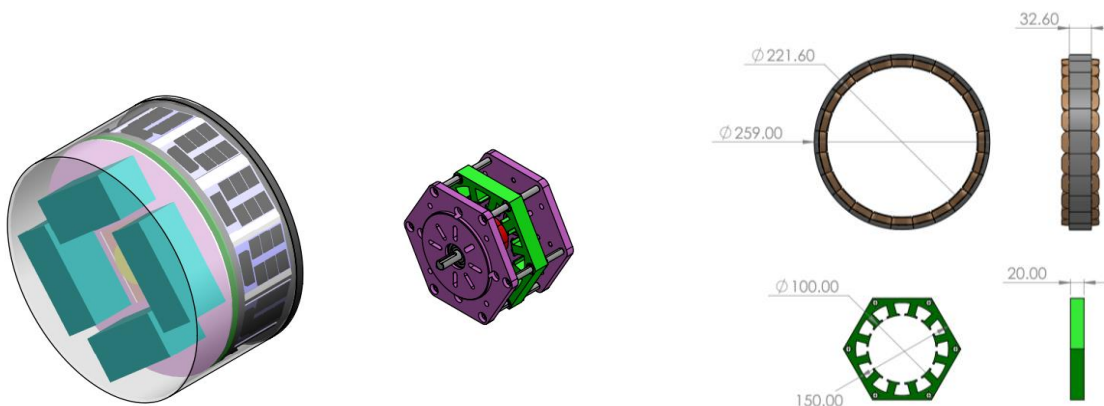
1 To-scale comparisons of the developed quadrotor machine and identified sample design: (a) housing integration; and (b) stator dimensions in millimeters. Note the final demonstrator dimensions vary from those shared above.
